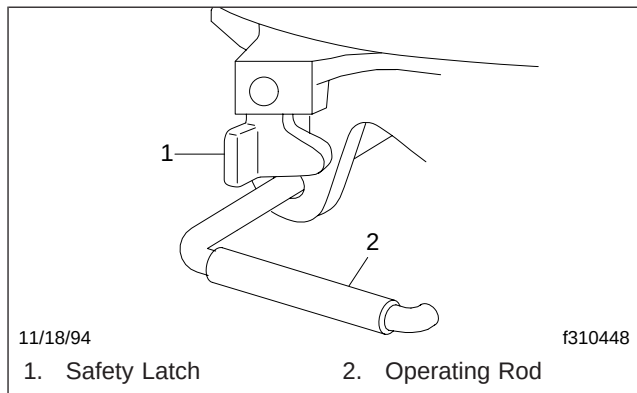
, Simplex Kingpin Locking Mechanism, Safety Latch (locked position)
